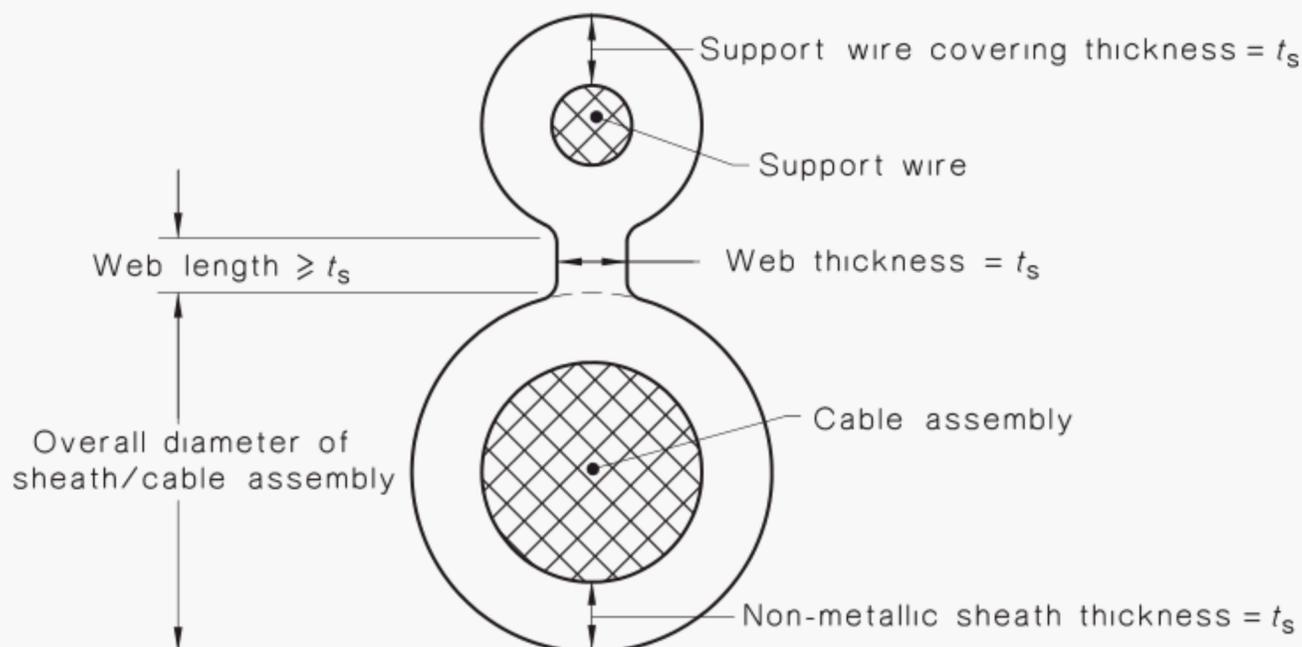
AERIAL CONTROL CABLE CONSTRUCTION
